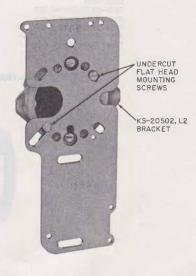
155A Adapter (Current Model) Mounted on a Standard Electrical Outlet Box Using Bottom Mounting Holes
